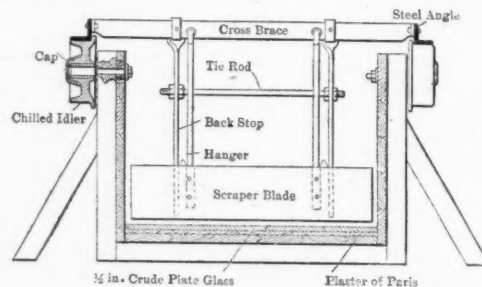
CROSS SECTION THROUGH SALT CONVEYOR.
